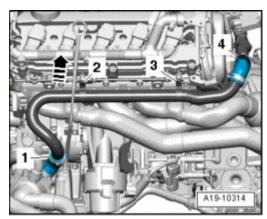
Removing Bolts, Oil Dipstick Guide Tube Upward & Loosening Hose Clamps And Removing Left Coolant Pipe From Coolant Hoses
